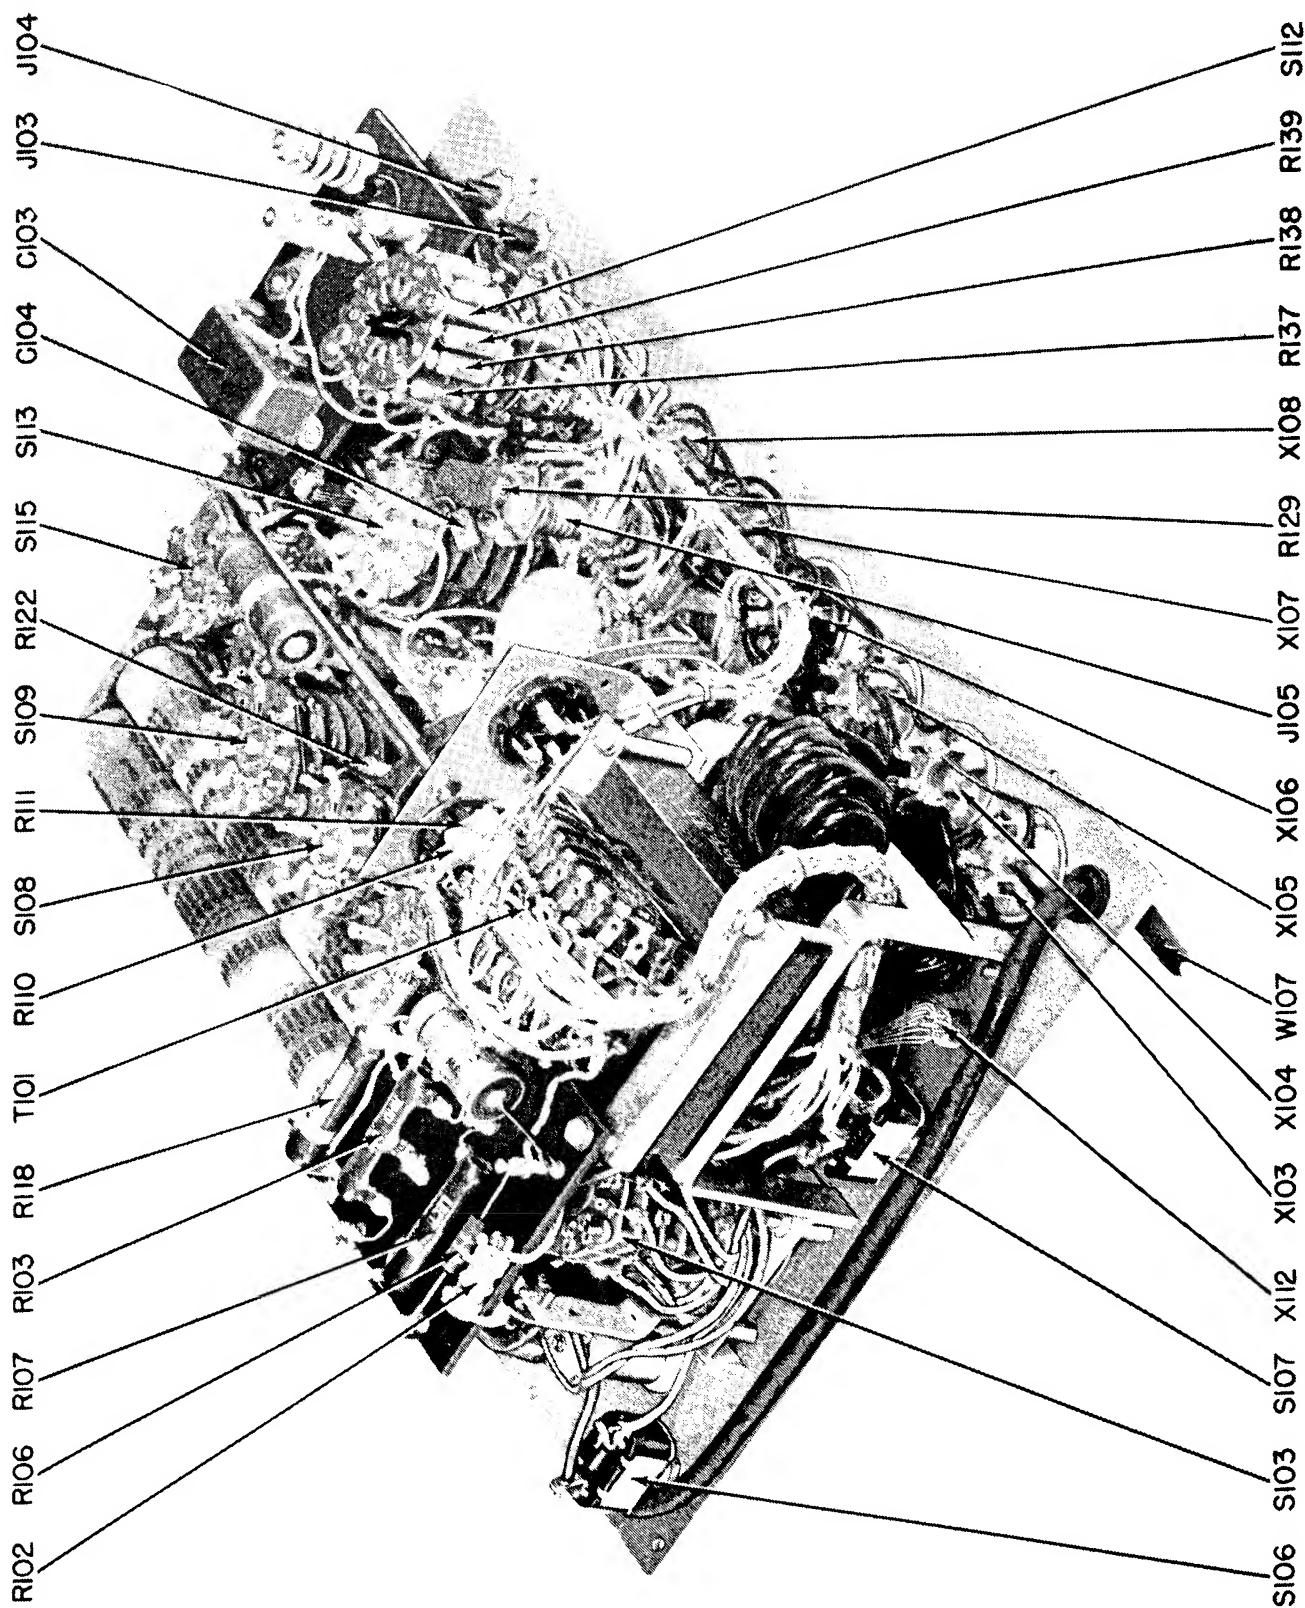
Internal View of Tube Tester TV-3/U (Rear Left Oblique)
